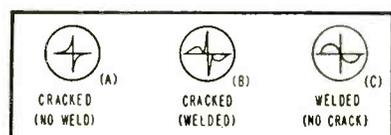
Typical patterns for (A) cracked, (B) cracked and welded, (C) welded metal
